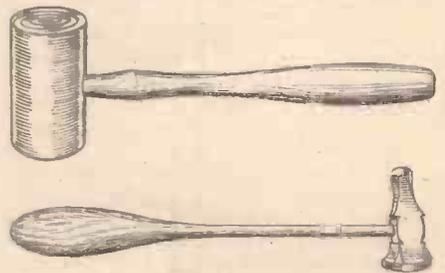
Above, a raw hide hammer, used on polished or finished parts to avoid marking. Below; a repoussé hammer.
